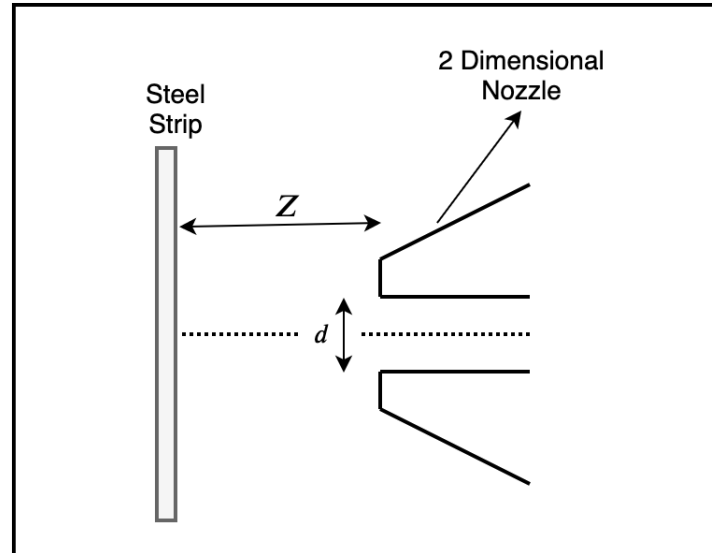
Schematic of two dimensional nozzle and steel strip
